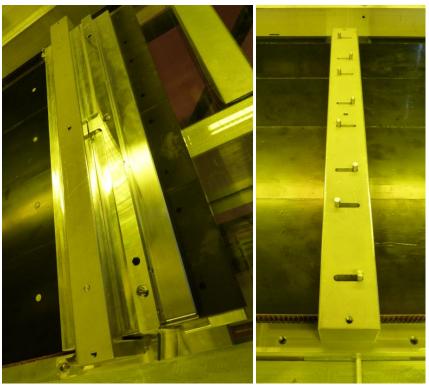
Bridge placed on endplug and on endpieces mirror side and aligned with dowel pins
